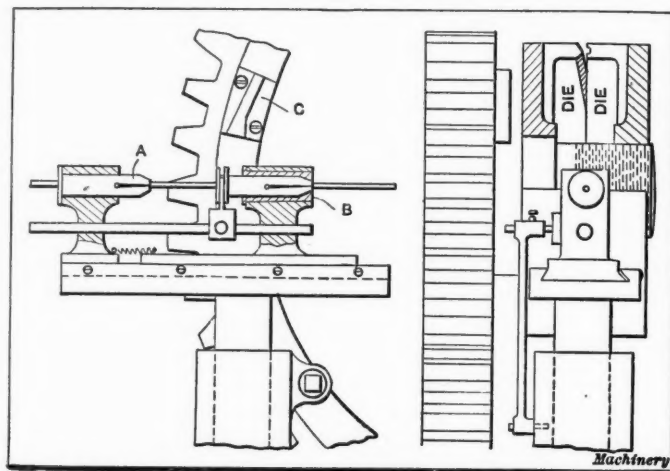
Diagrammatical Outline of the Main Features of the Ball Blank Rolling Machine
